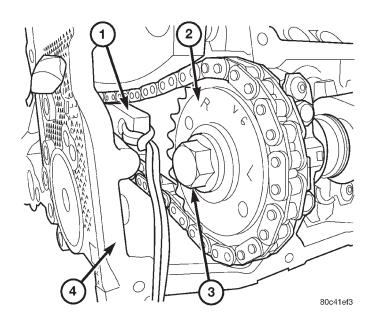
CAMSHAFT DRIVE GEAR REMOVAL/INST
